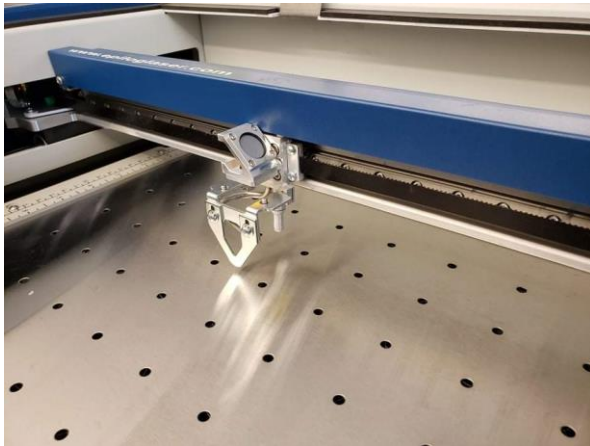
Focusing tool of laser engraver. The focus is set by establishing contact with the end of the fixture and the specimen surface to be engraved.
